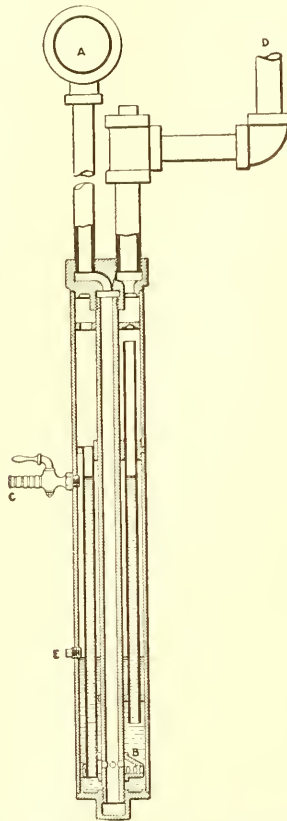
Oxweld Low-Pressure Hydraulic Back-Pressure Valve.
